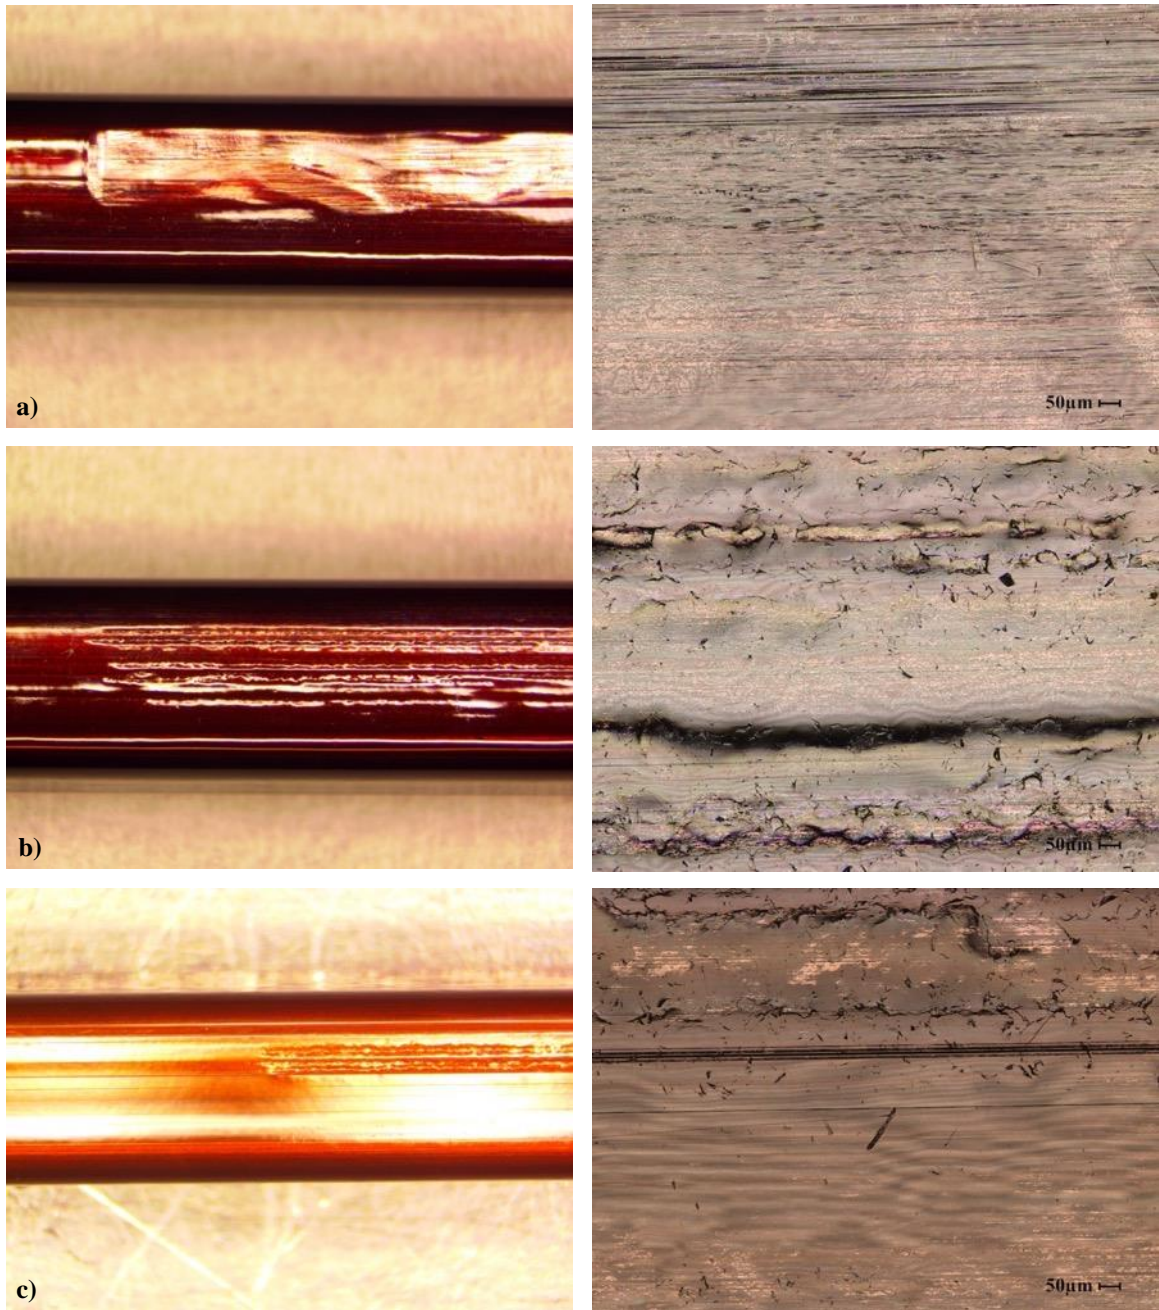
Macroscopic image (left) and Keyence laser microscope image (right) of damaged inflicted to aluminum and copper wire surface from smooth 3 mm radius support roller and 24 mm radius support roller with machined surface. (a) Aluminum against 3 mm radius support roller which causes ironing and light scratching. (b-c) Aluminum and copper against 24 mm radius support roller which caused gauging and associated cracking around gauge lines.
